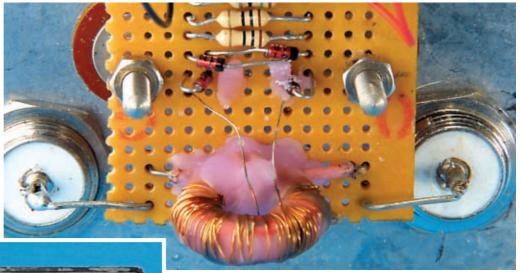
All components are mounted on a small piece of Perf-board mounted between the two coaxial sockets.
